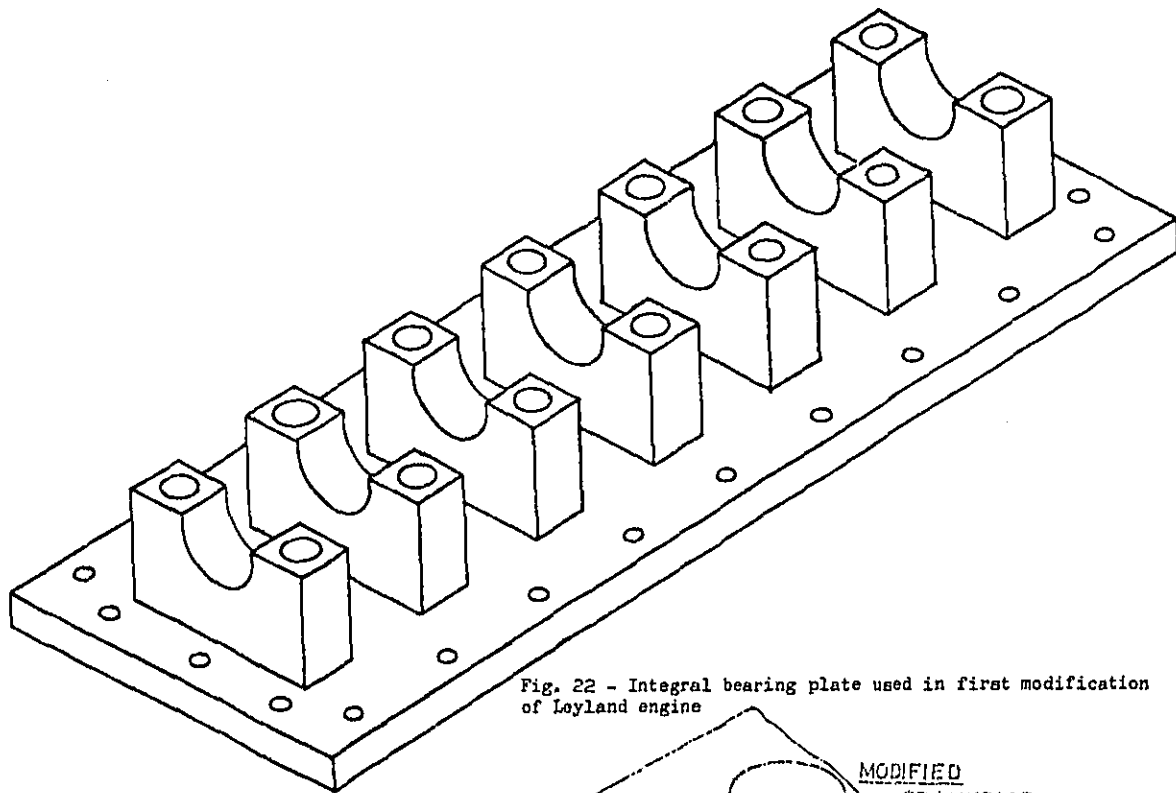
Integral bearing plate used in first modification of Leyland engine
